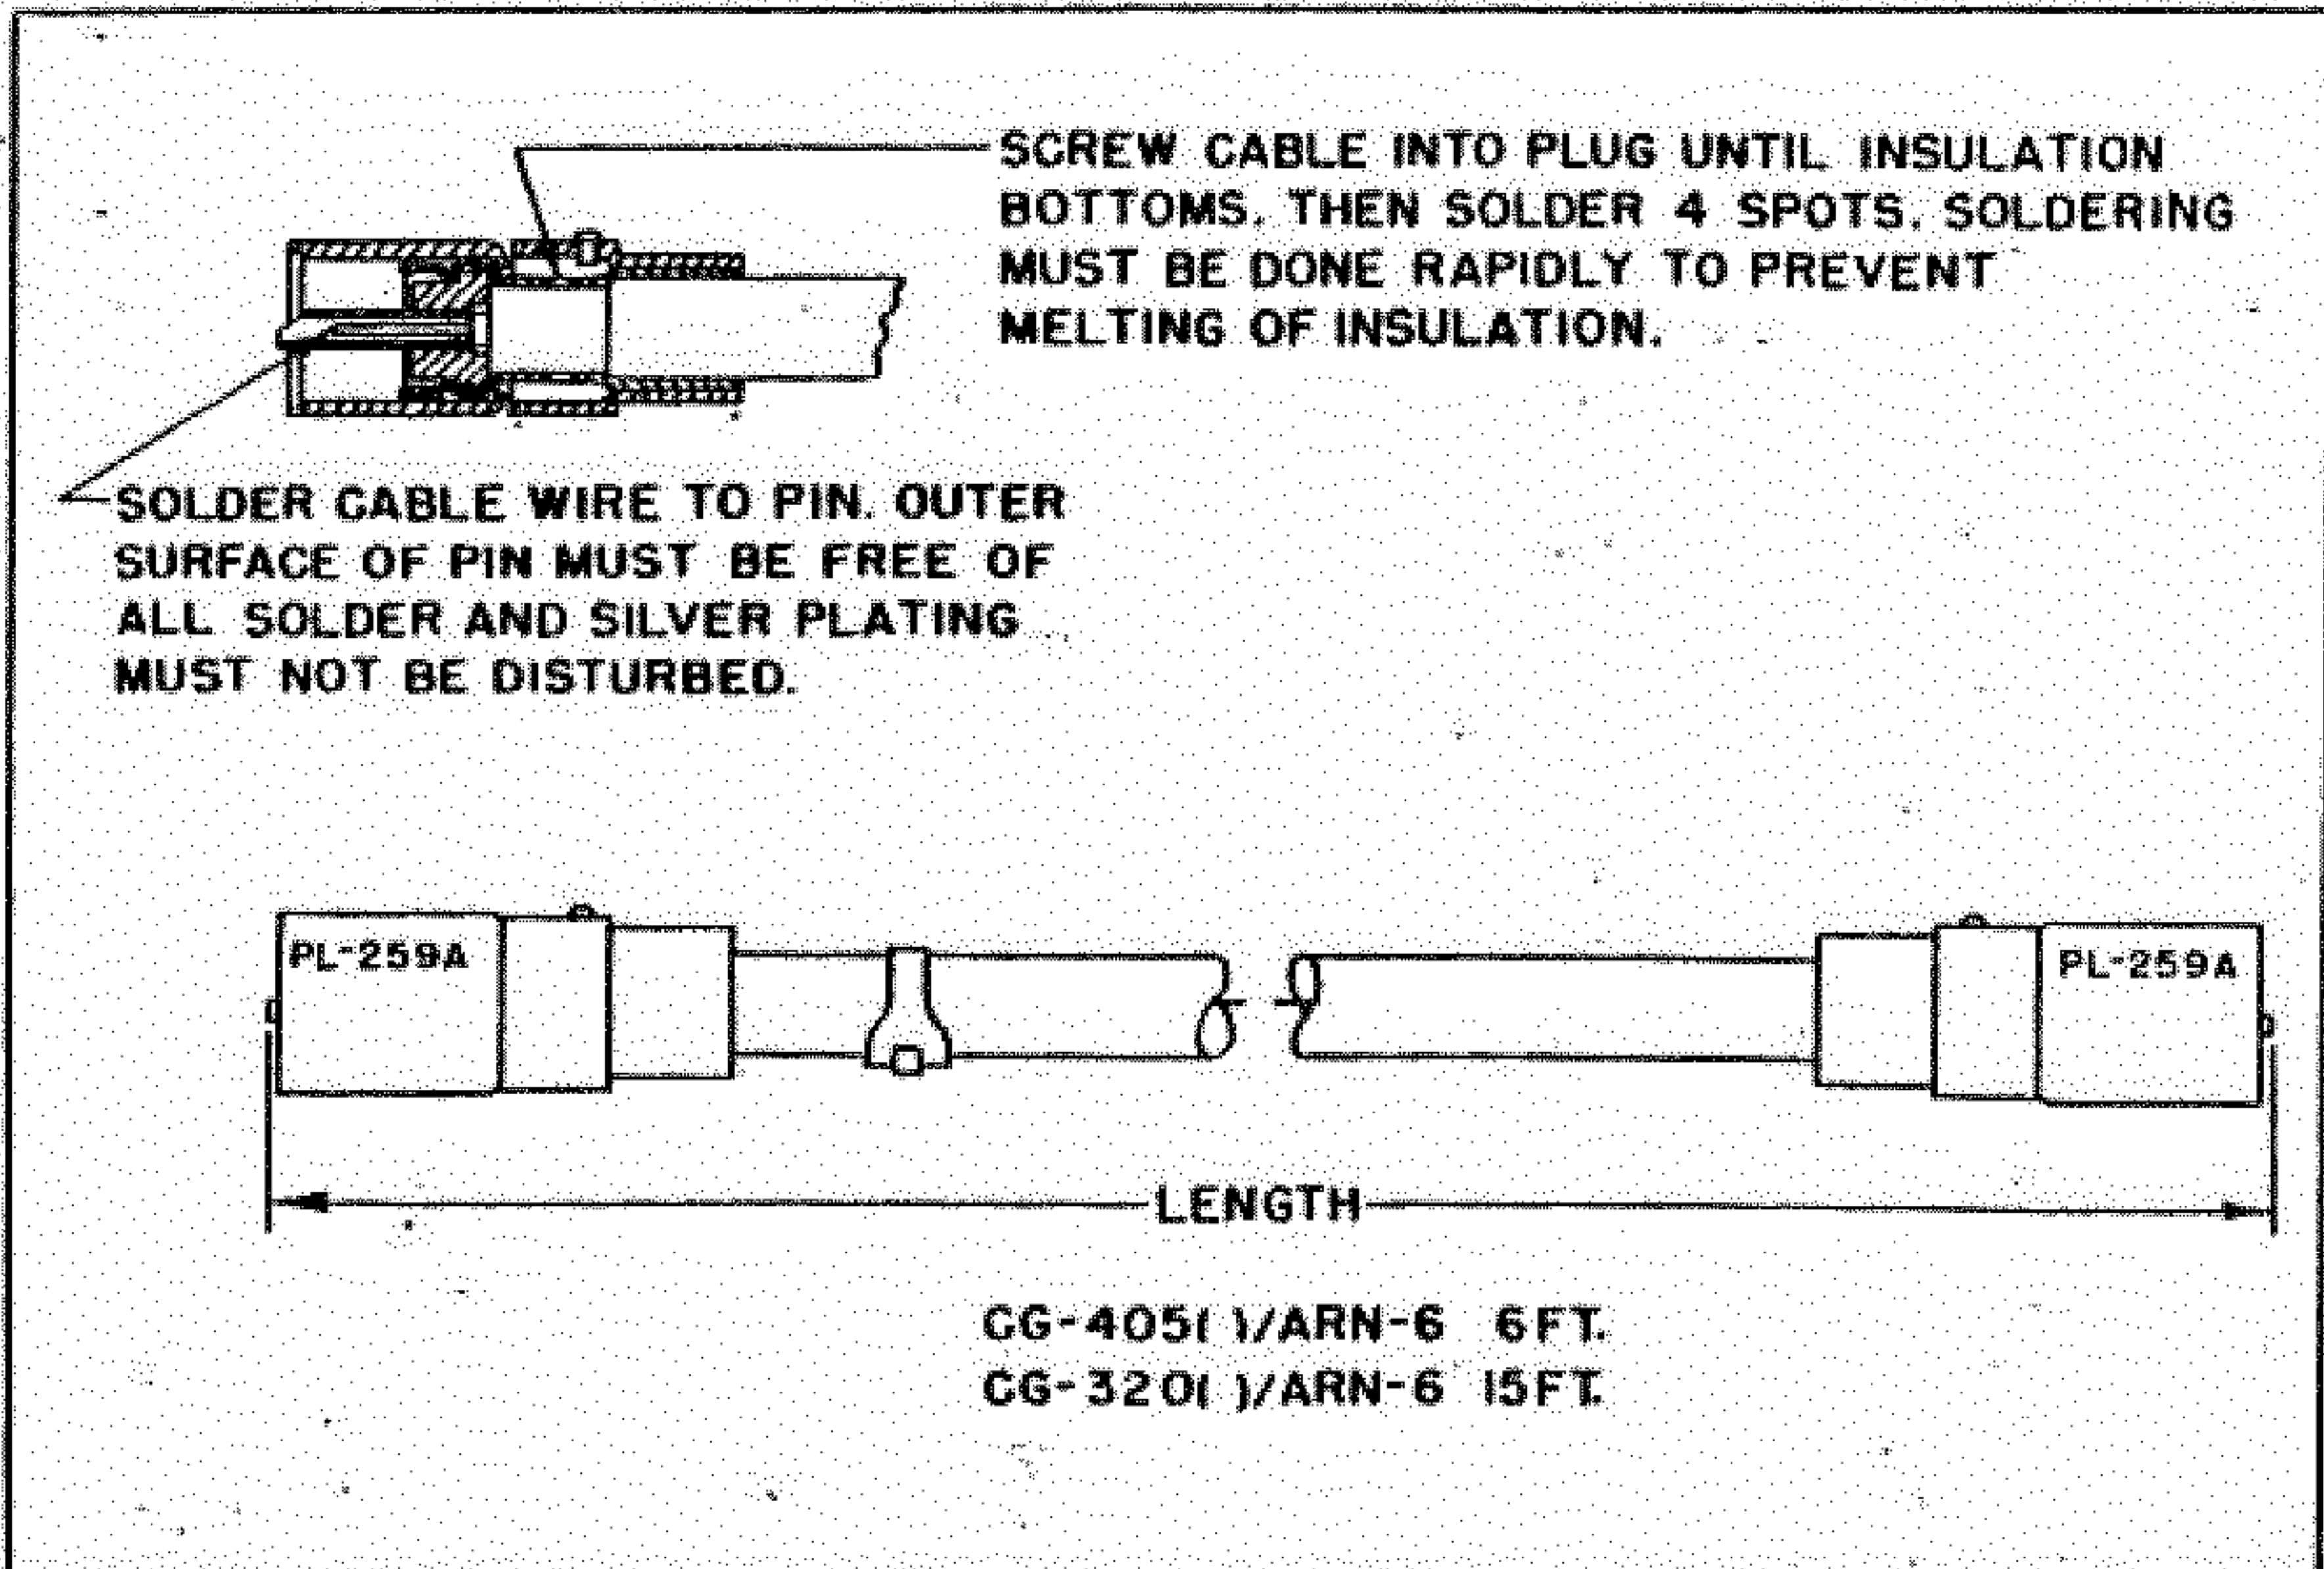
Cord CG-320/ARN-6 or CG-405/ARN-6, Outline Drawing
